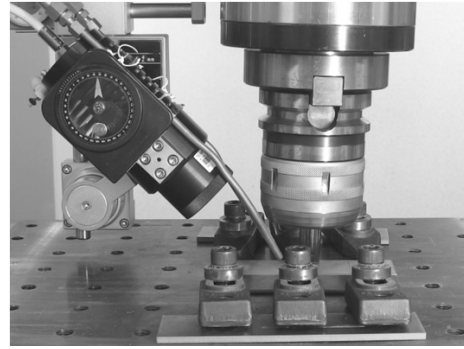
Setup for laser assisted FSW hybrid welding process
